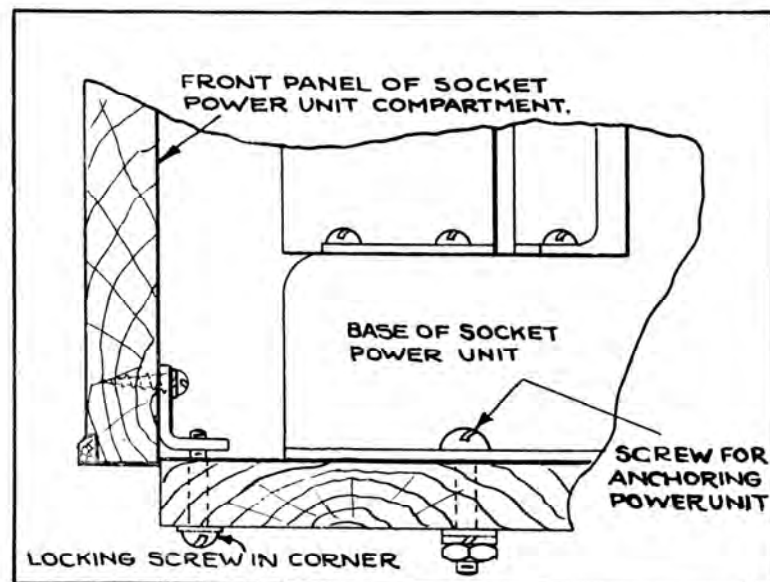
Section View of lower front corner of Socket-Power Compartment, showing Screws to lock front Panel
